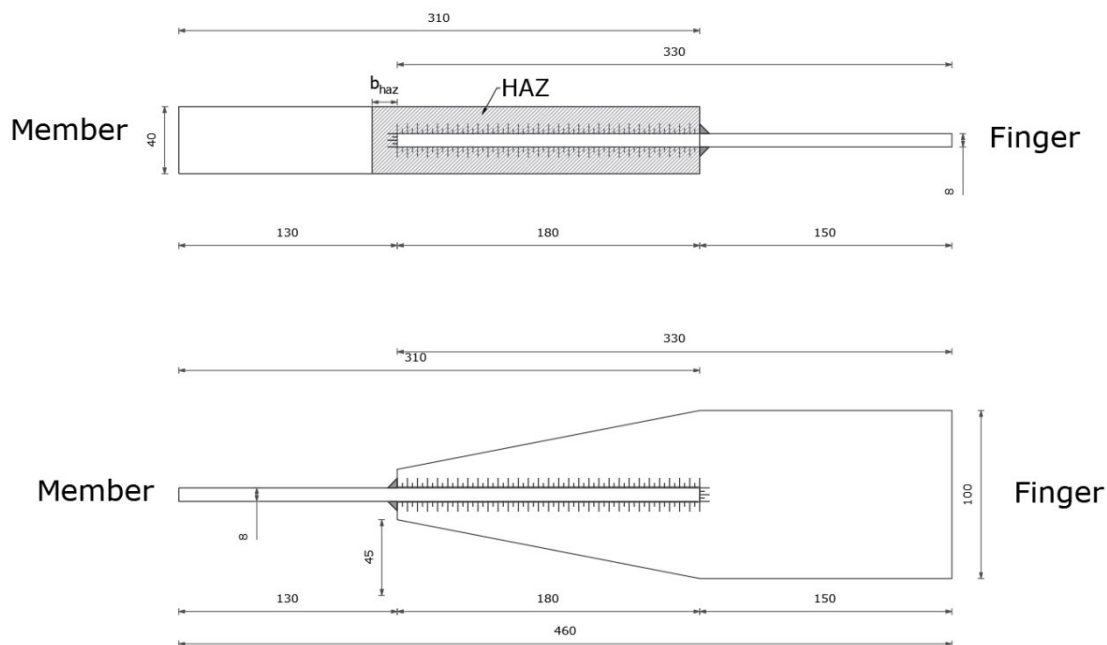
Applied dimensions in the numerical model for the welded cruciform variant 2.
